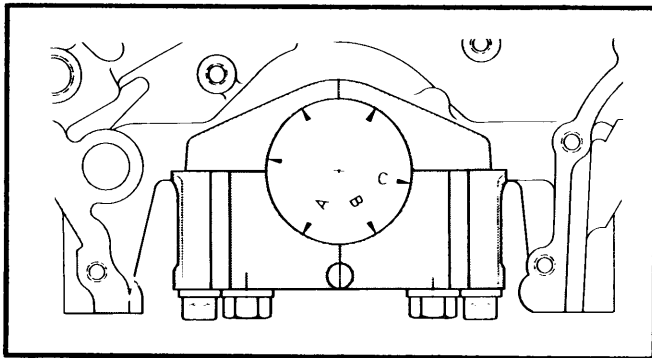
Location for Measuring Main Bearing Bore Diameter
